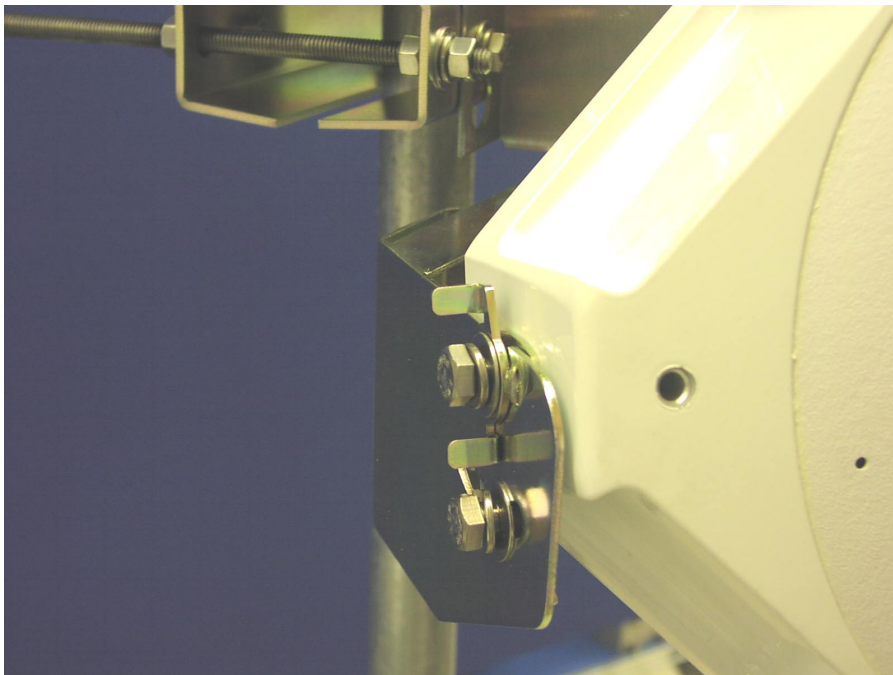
Detail of Up/Down Pivot & Adjustment Bolts and Finger Cam
